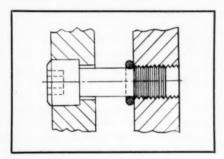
A commercial socket head cap screw is used in this design of cover latch.
